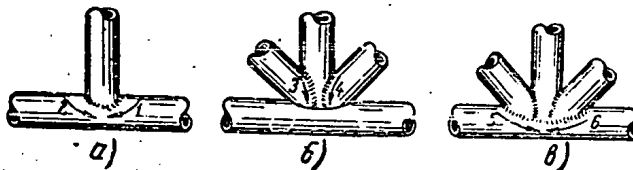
Working order in welding a tube with an upright and two struts.
